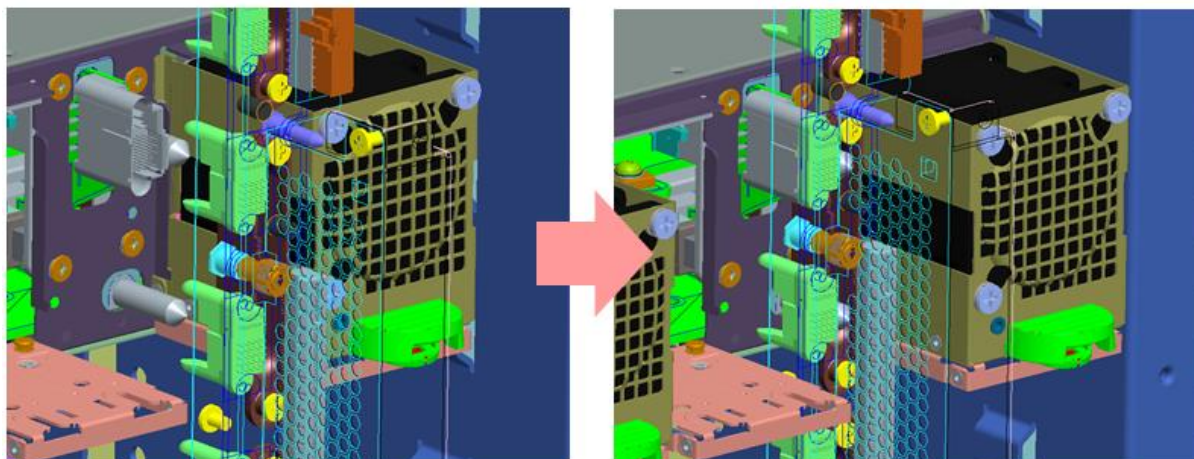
Example of a MBP interface on a 20U server chassis, including a single MBP header mounted to an interposer card, and coarse alignment pins.
